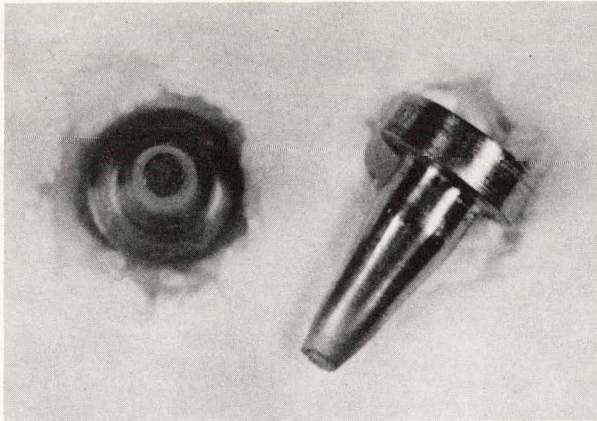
Fracture Surface of Shaped 212-B Specimen
